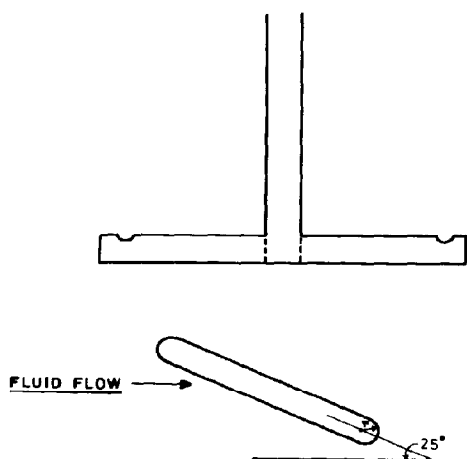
(c). Gas inducing type flattened cylindrical impeller.
